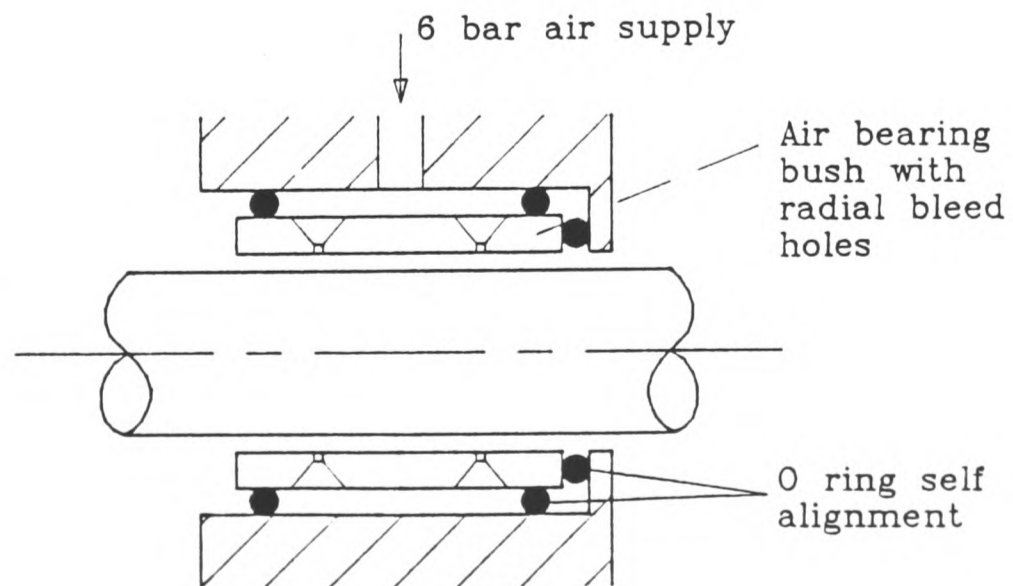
Air bearing arrangement for Types 1 and 2.
